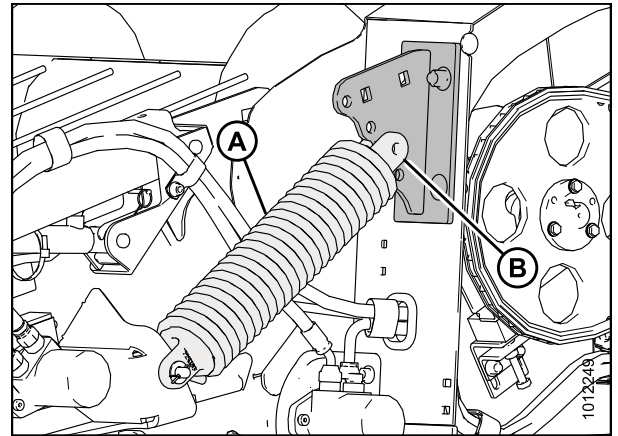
Left Side Anchor Shown – Right Side Opposite
